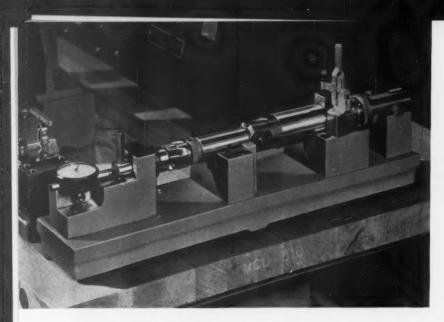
Special pre-setting gage makes use of V-block supports, a quick-acting clamp, and a dial indicator for adjusting the over-all length of multiple-diameter boring tool.
